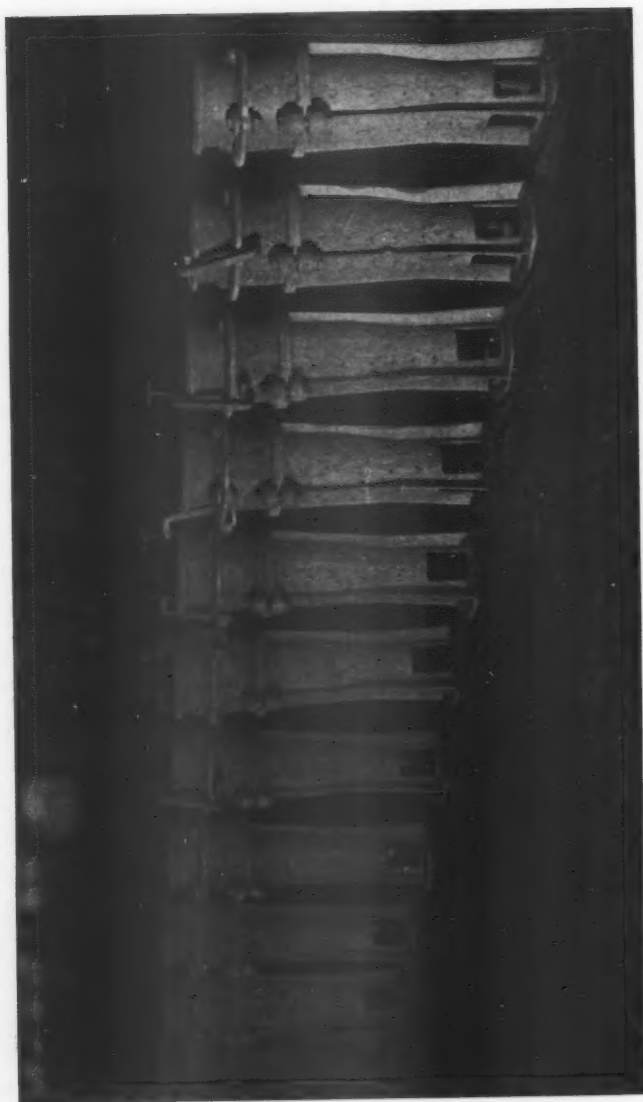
SINGLE-FLASK MOLDS READY FOR POURING
